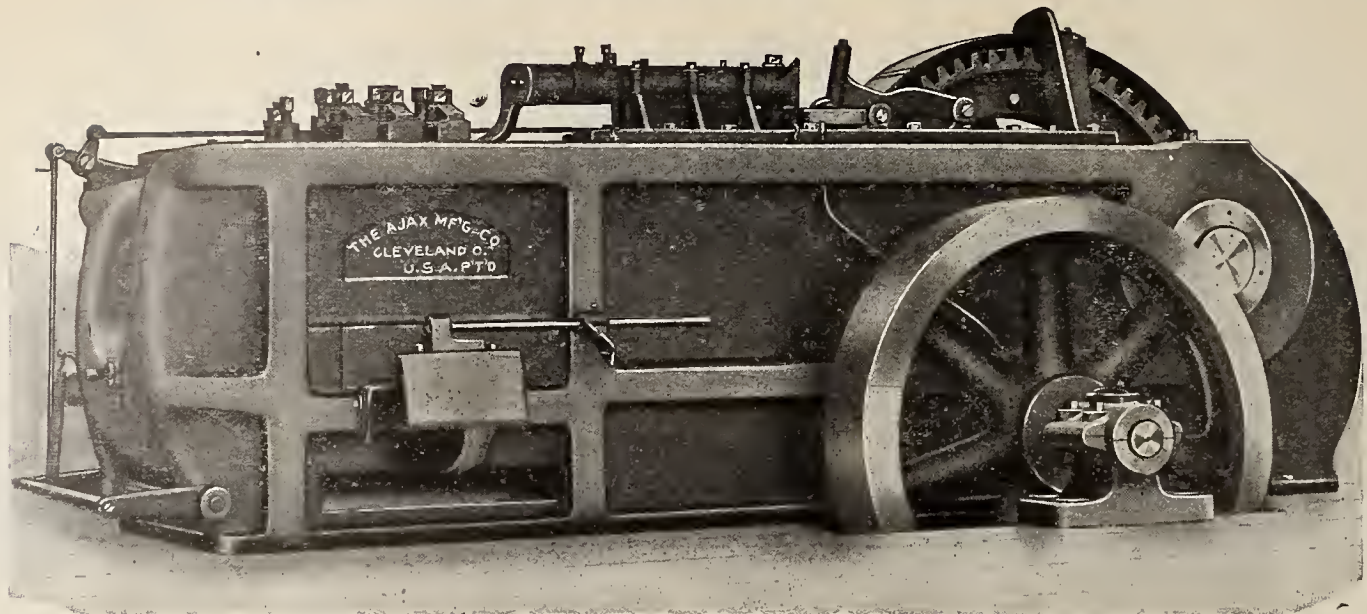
5-IN. AJAX HEADING, UPSETTING AND FORGING MACHINE C. P. R. SHOPS.
